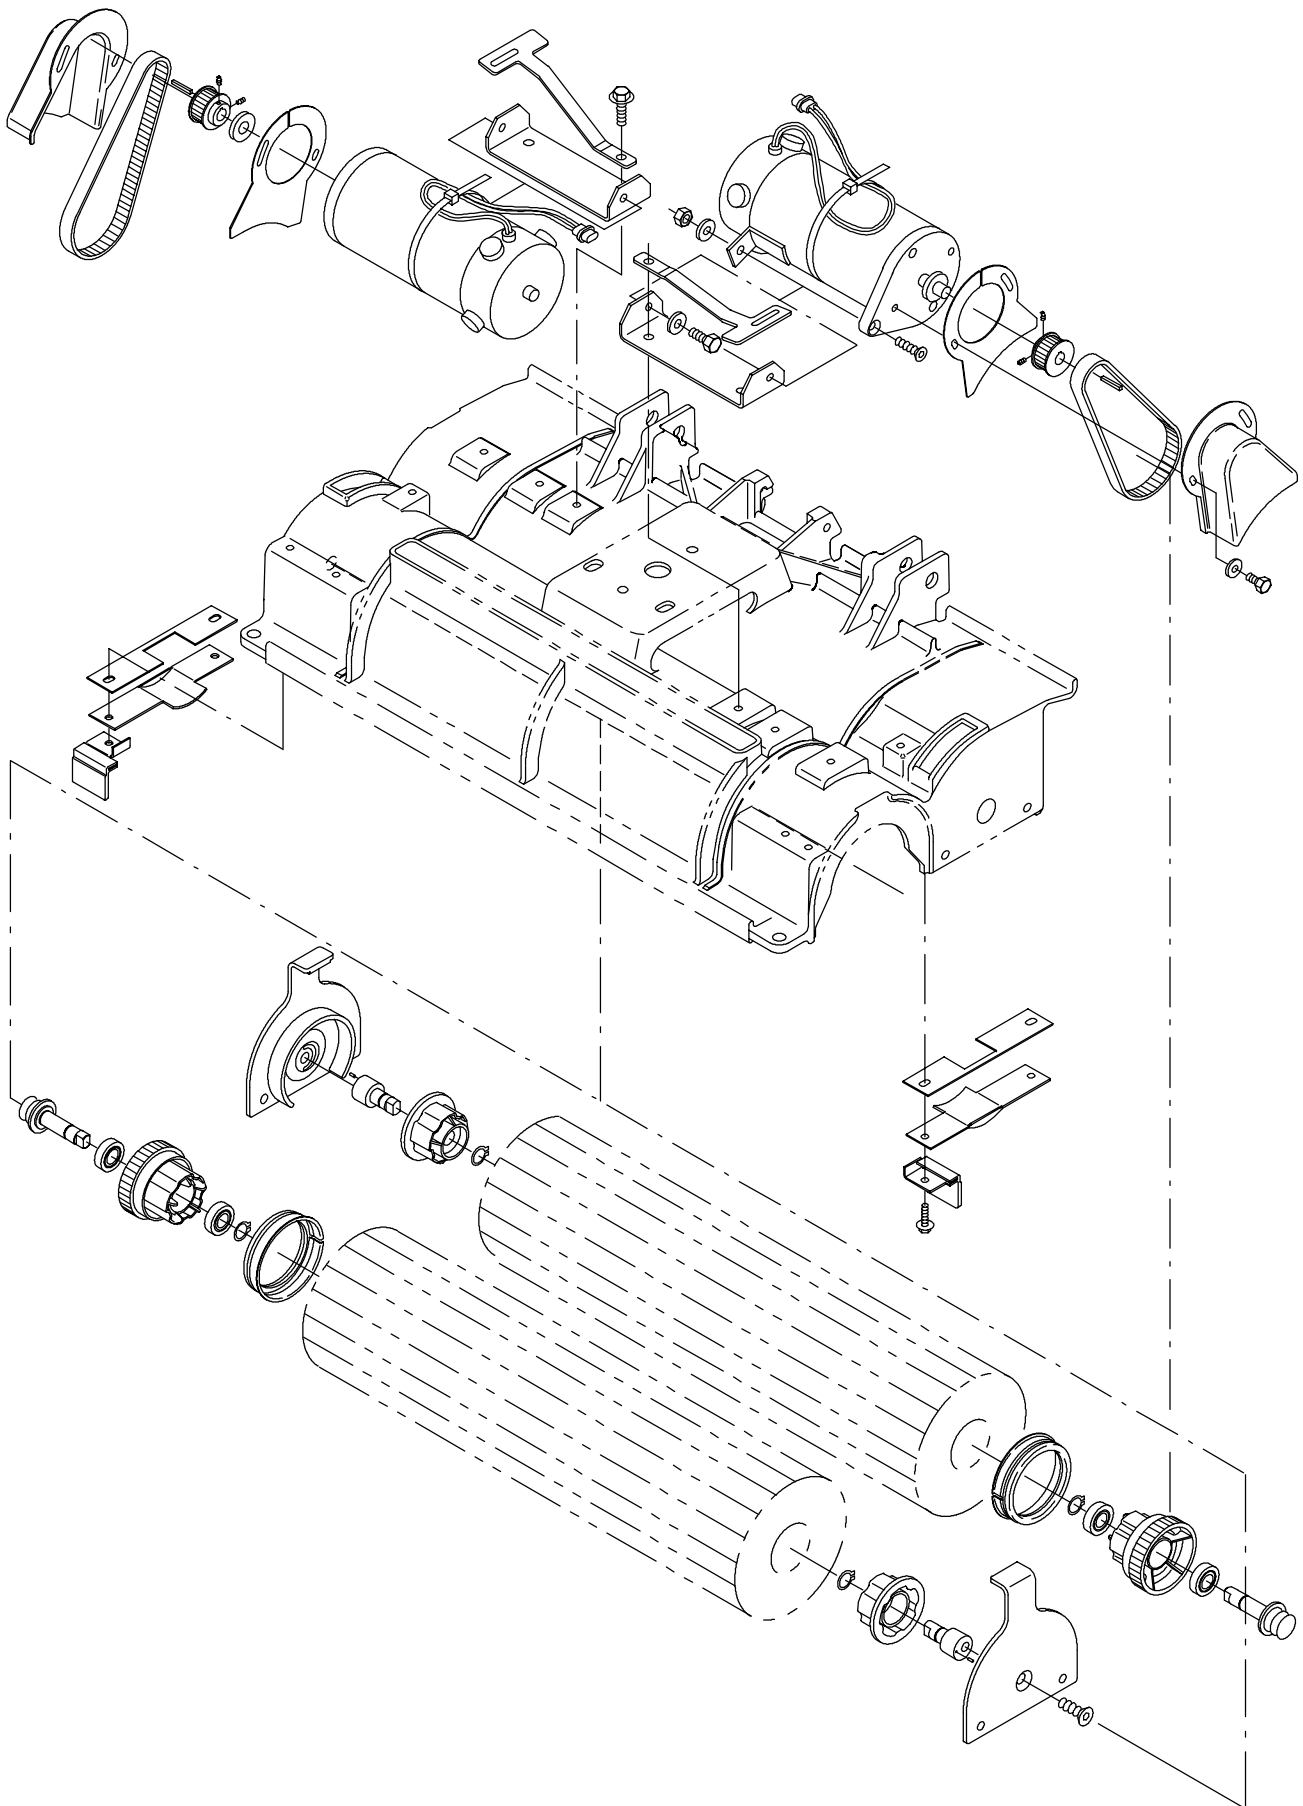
Cylindrical Scrub Head Drive Motor Group
